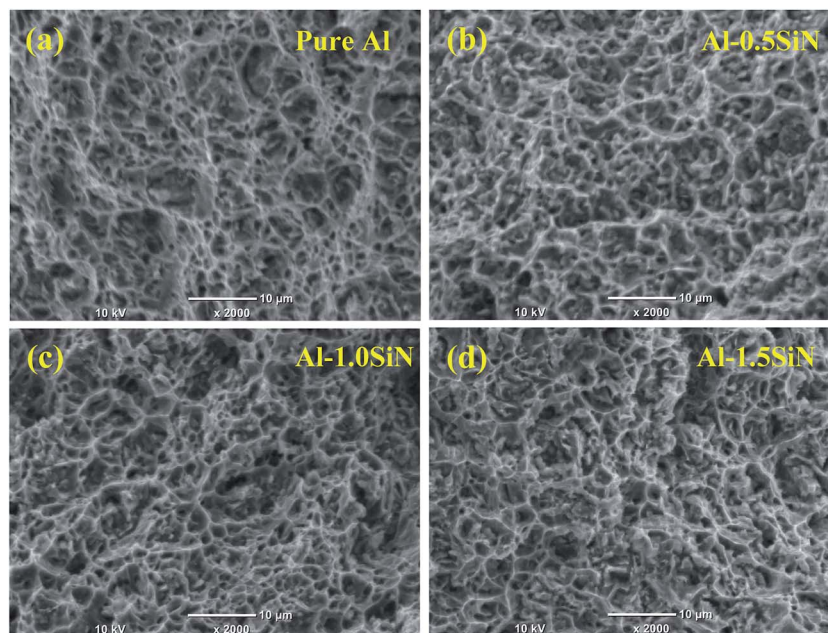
Tensile fracture surfaces of extruded Al-Si<sub>3</sub>N<sub>4</sub> nanocomposites after testing at 200 °C.
